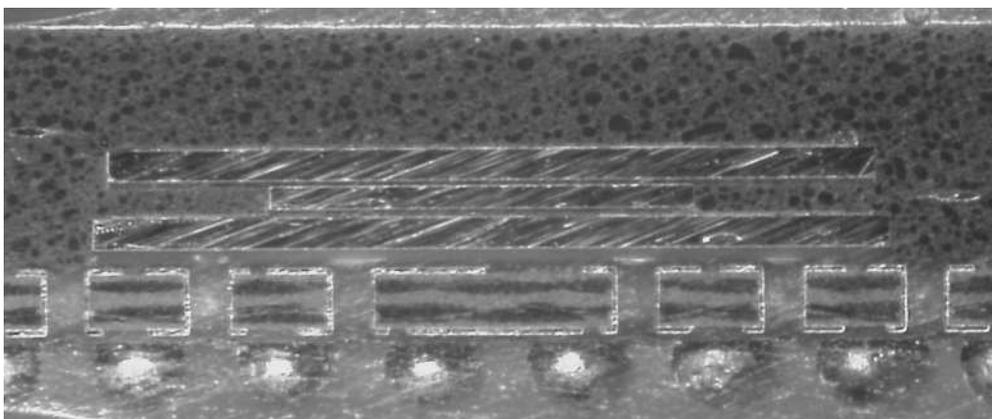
Cross-sectional view of SS-SiP with two-metal board.
